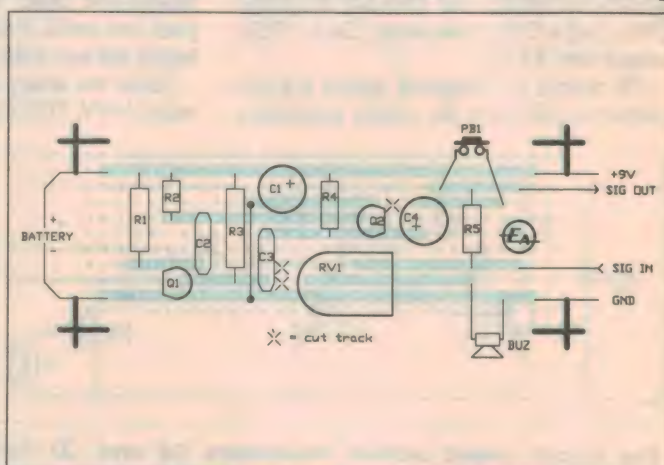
The stripboard layout. As with the PCB construction, only the unit to which the battery is attached requires the smoothing capacitor C1.
